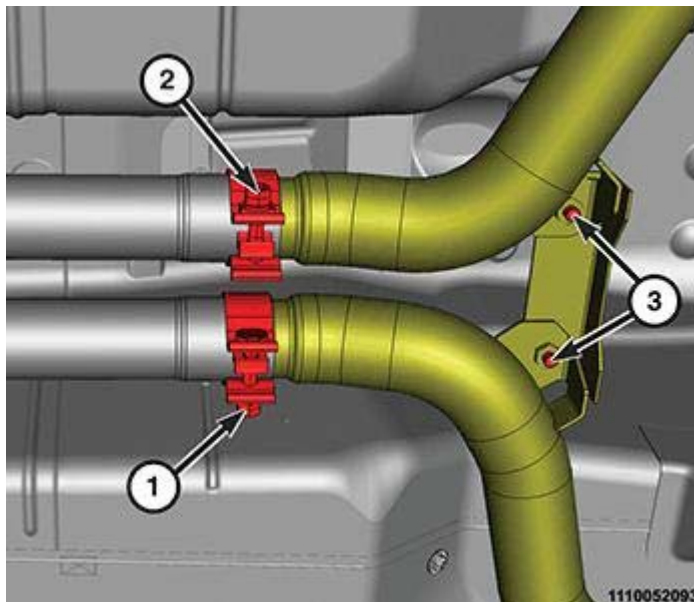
Front Exhaust Pipe Band Clamps & Support Bracket Bolts
